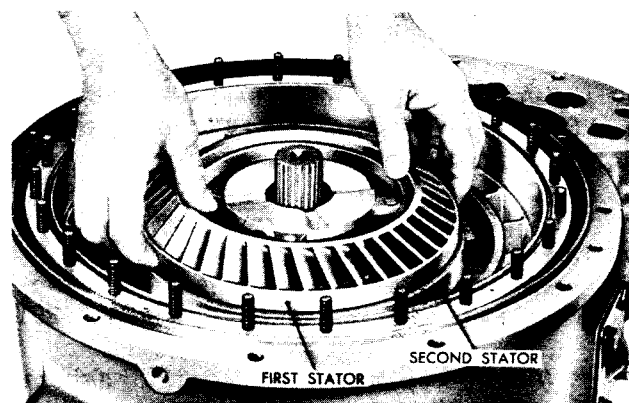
Installing (or removing) first-stator assembly ^{S2517}
